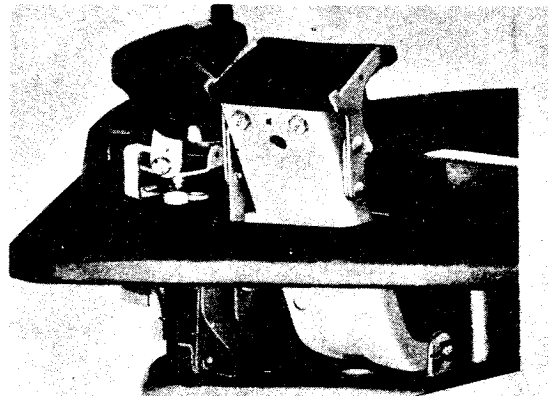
REAR VIEW WITH CENTER ESCUTCHEON REMOVED
